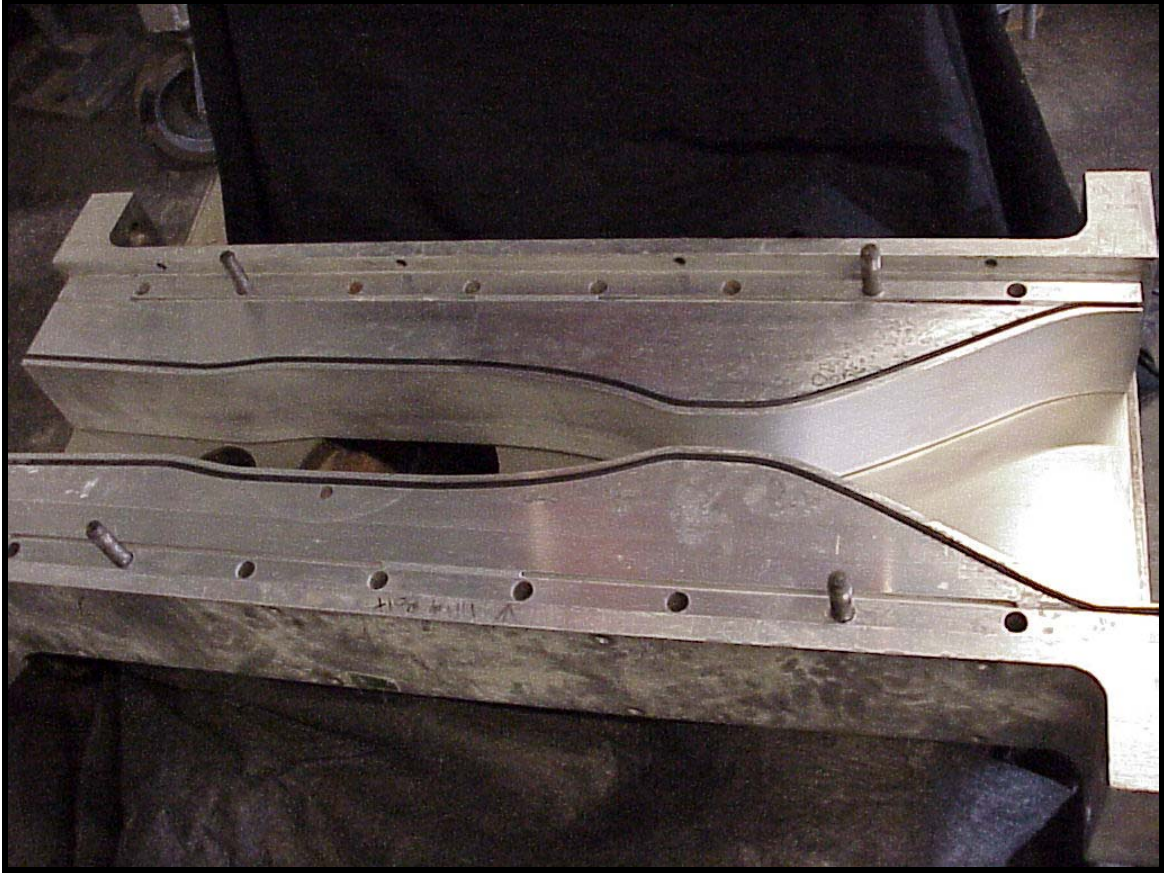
Interior view of the Mach 2.8 nozzle block design.
